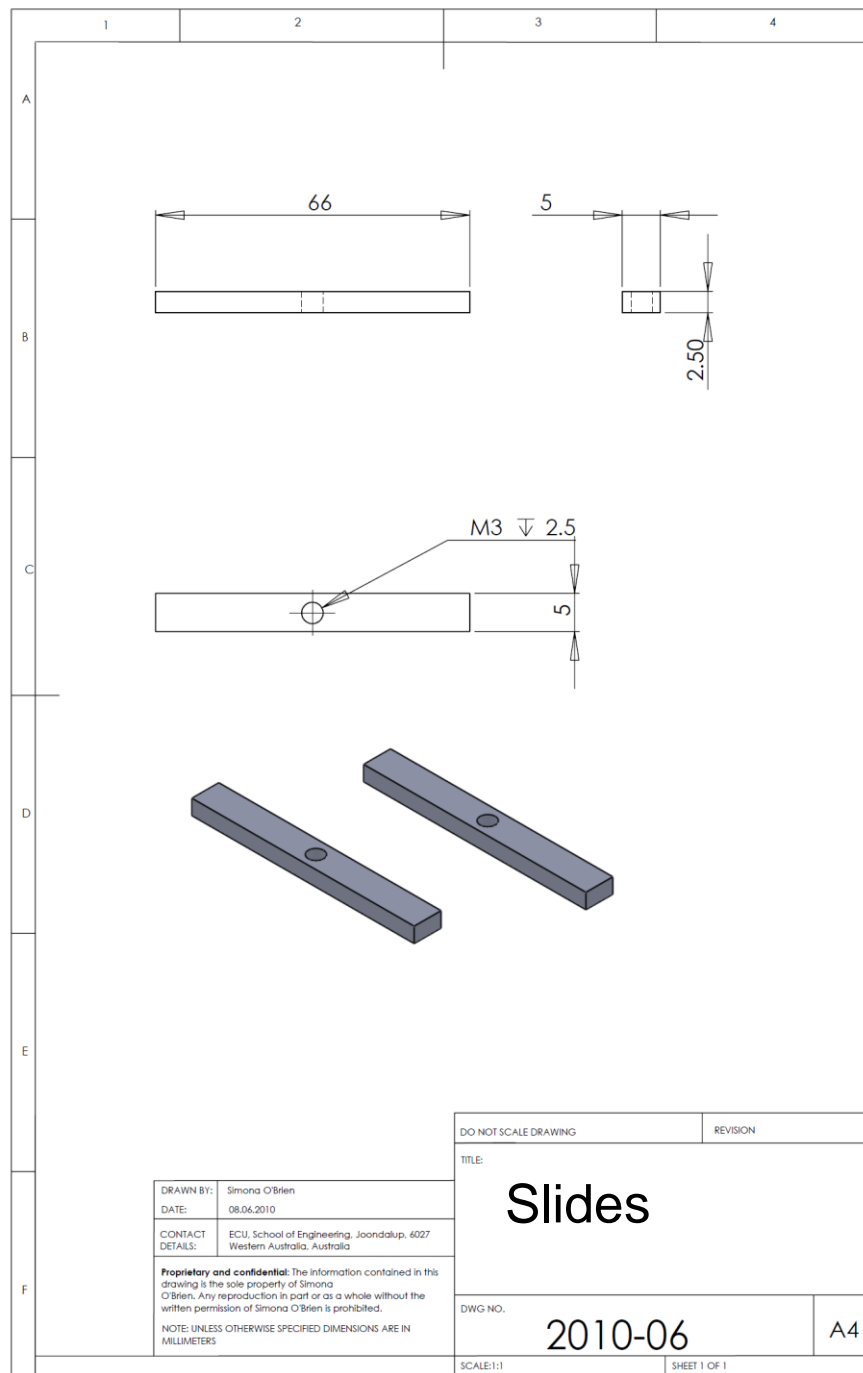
Slides used for mechanical mounting of the enamel specimens.
